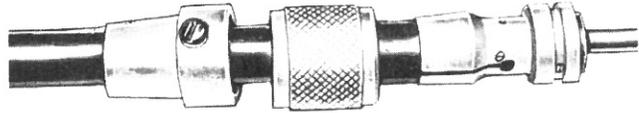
Plug Parts Assembled on Coaxial Cable
